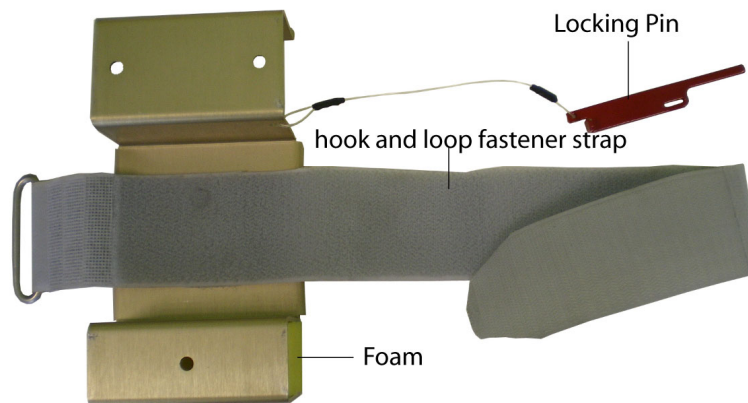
Mounting Bracket, AS, P/N S1820511-02
